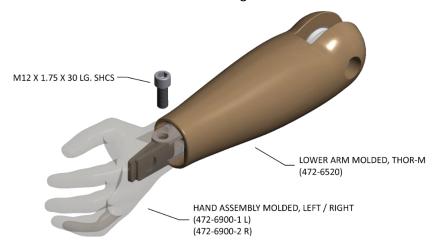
Hand Molded Secured to Lower Arm Molded with M12x30 SHCS
